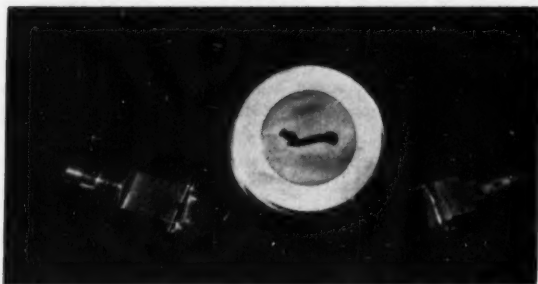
Tools used to form alarm verge hammer showing—left to right—lower punch with core pin in position, die with tungsten-carbide insert, and upper punch
